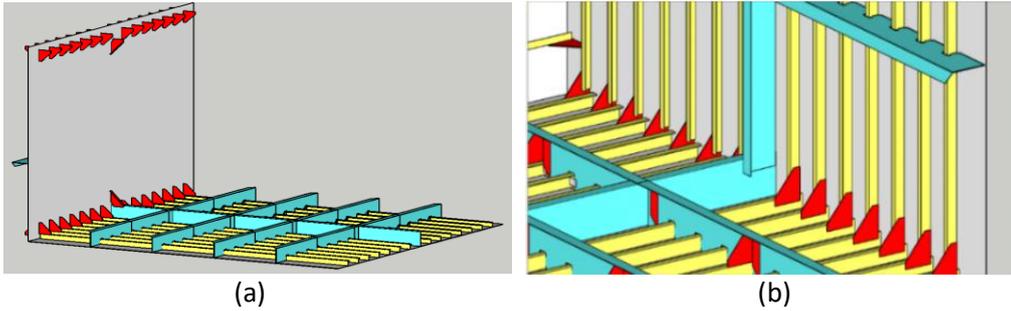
Erection (a) Transversal bulkhead frame 21 Center, and (b) Center girder joint to vertical stringer
